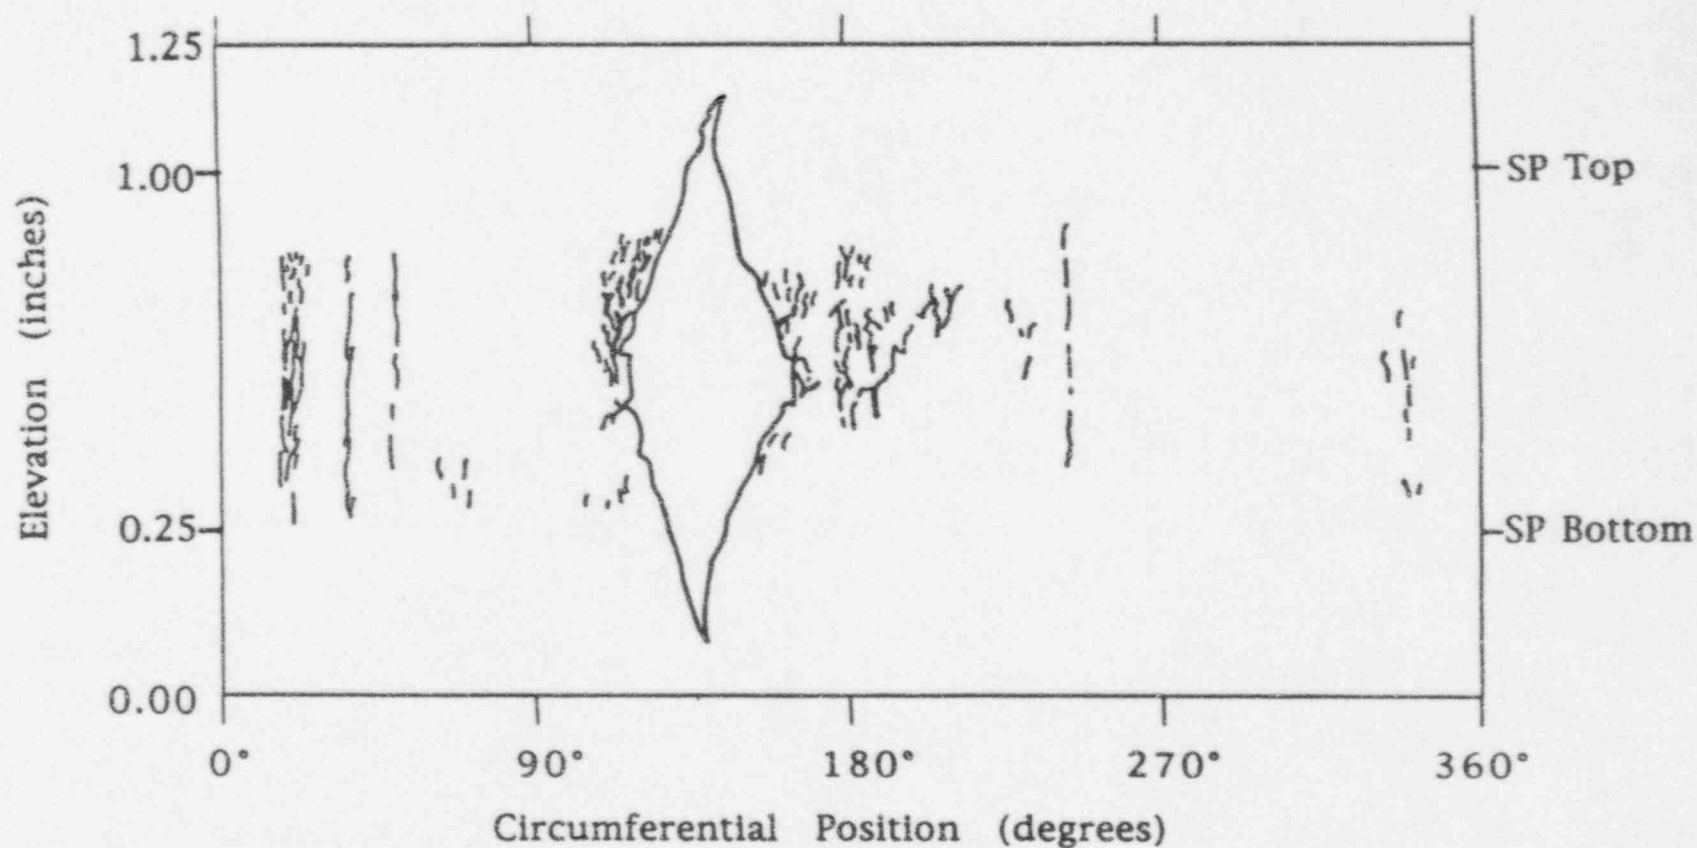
Sketch of the OD surface crack distribution found at the seventh tube support plate (TSP7) region of Tube R20-C7. Also shown is the location of the burst fracture opening. The burst opening extended beyond the TSP crevice region, but the corrosion cracking on the burst fracture was confined to the crevice region.
